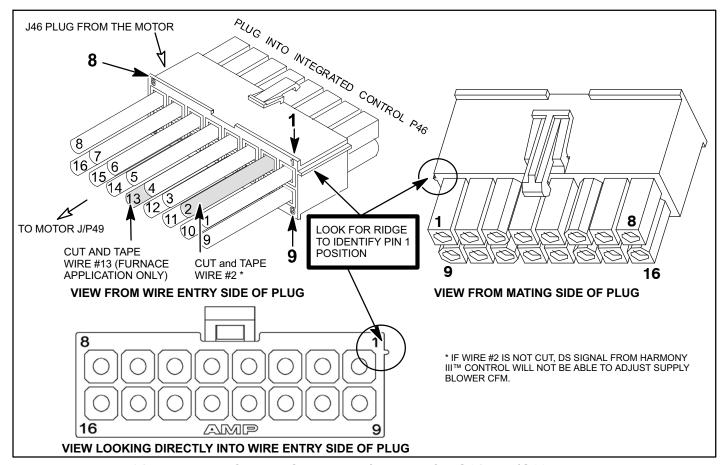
Integrated Control Cable Modifications for G61MPV/G60UHV Furnaces
